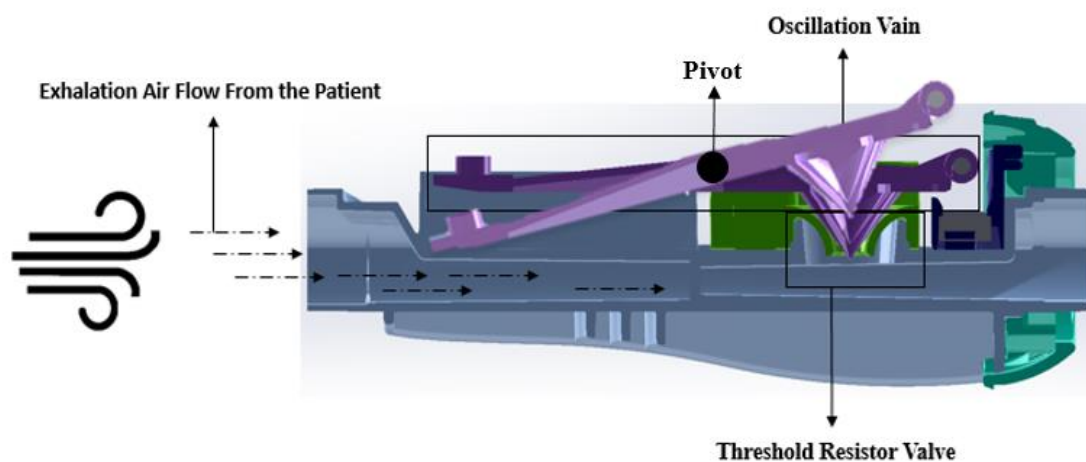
Mechanical components arrangement (threshold resistor valve and oscillation vain) employed in type A devices
